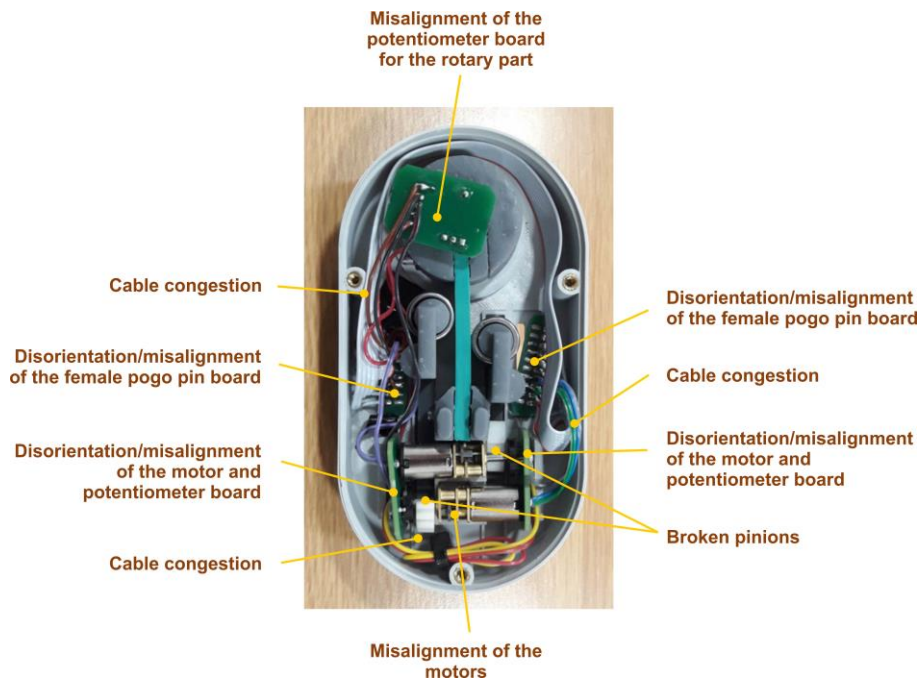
The damaged custom-designed linear gear mechanism and other parts inside the resistance module.
